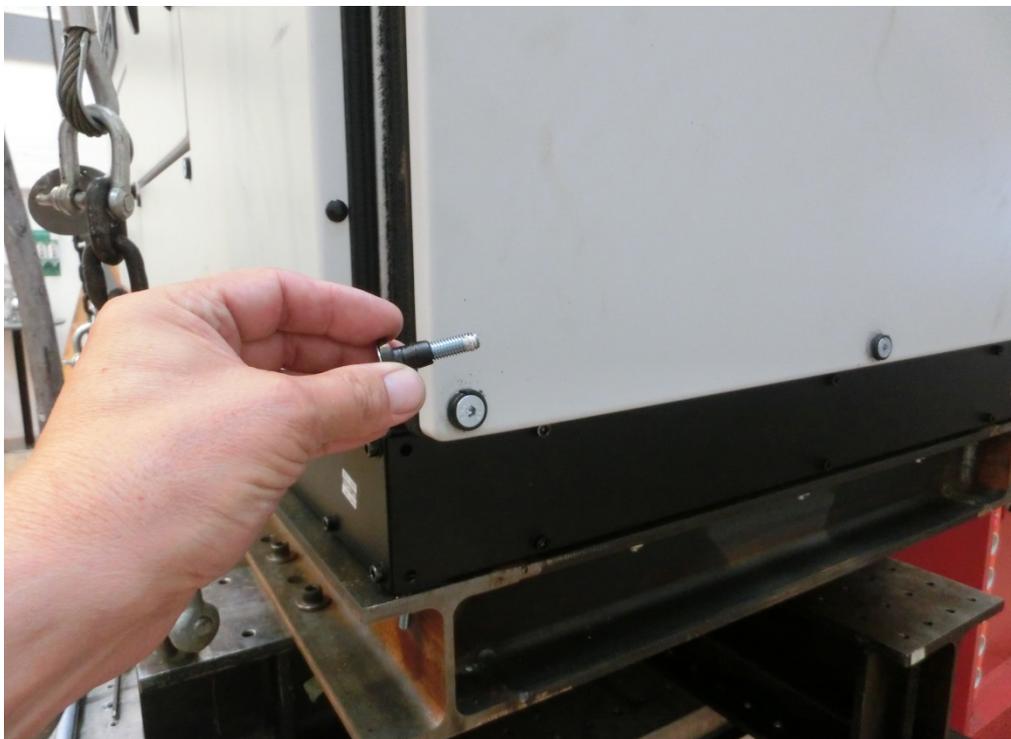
Visual Inspection: One mounting screw for right side plate fallen out.
